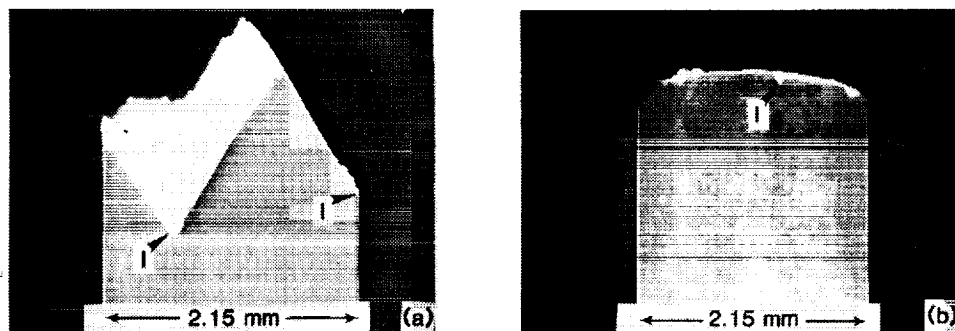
Fracture surface profile of 2090-T8E41 under (a) $R = -1$ and (b) Mini-TWIST loading.
